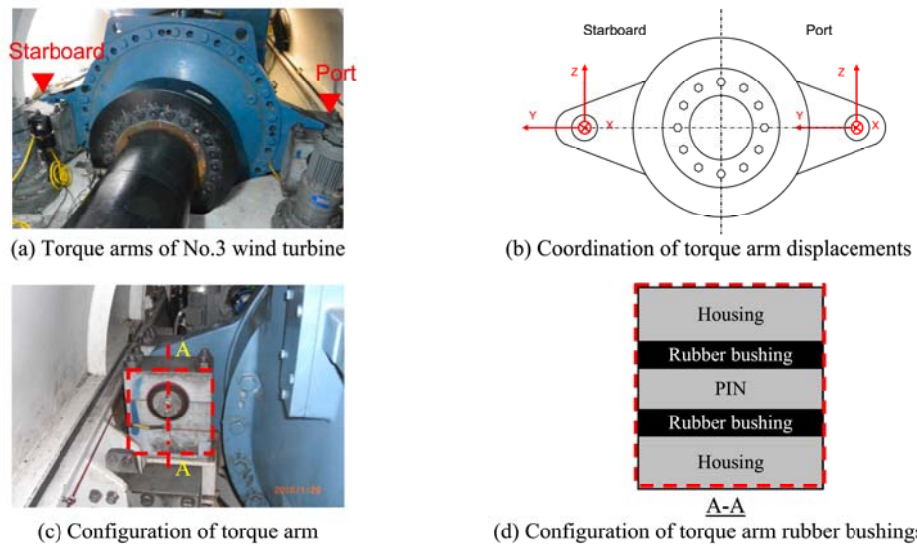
Configuration of torque arm and torque arm rubber bushings.
